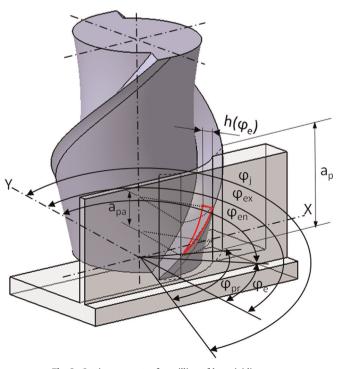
Cutting geometry for milling of low-rigidity parts.
